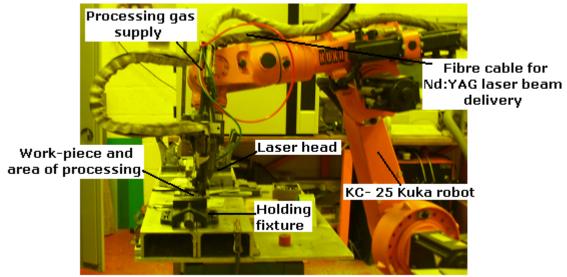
Nd:YAG Laser delivered by a fibre cable mounted on the KC-25 Kuka robot during laser peening of Si₃N₄, placed on a holding fixture.
